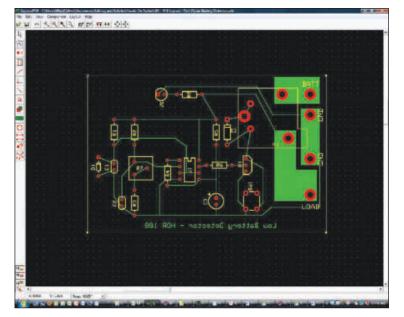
The final PCB layout with all traces on the board's copper side shown in green. Large rectangular areas of copper are used to carry the high load current.
